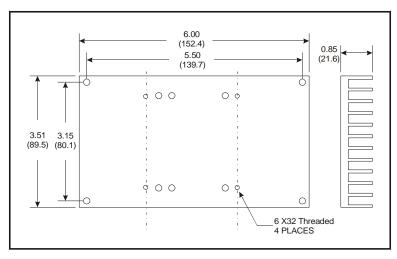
H-4X Heat Sink, Dimensions in Inches (mm)
